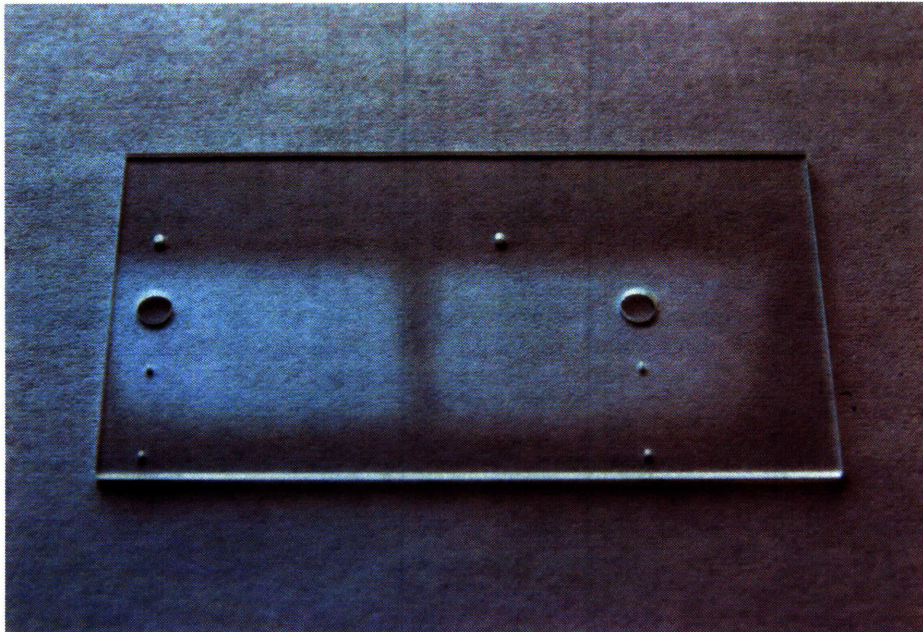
Picture of ultrasonically machined Layer 2 (SD-2 glass)
